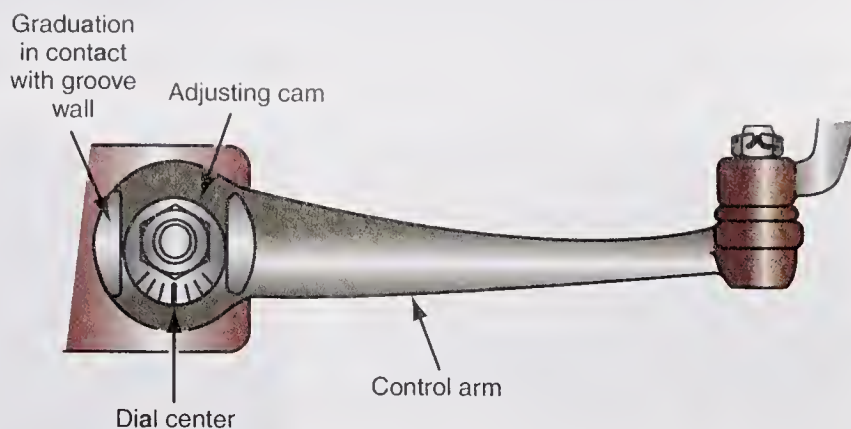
Graduated cam for rear camber adjustment, double wishbone suspension.
